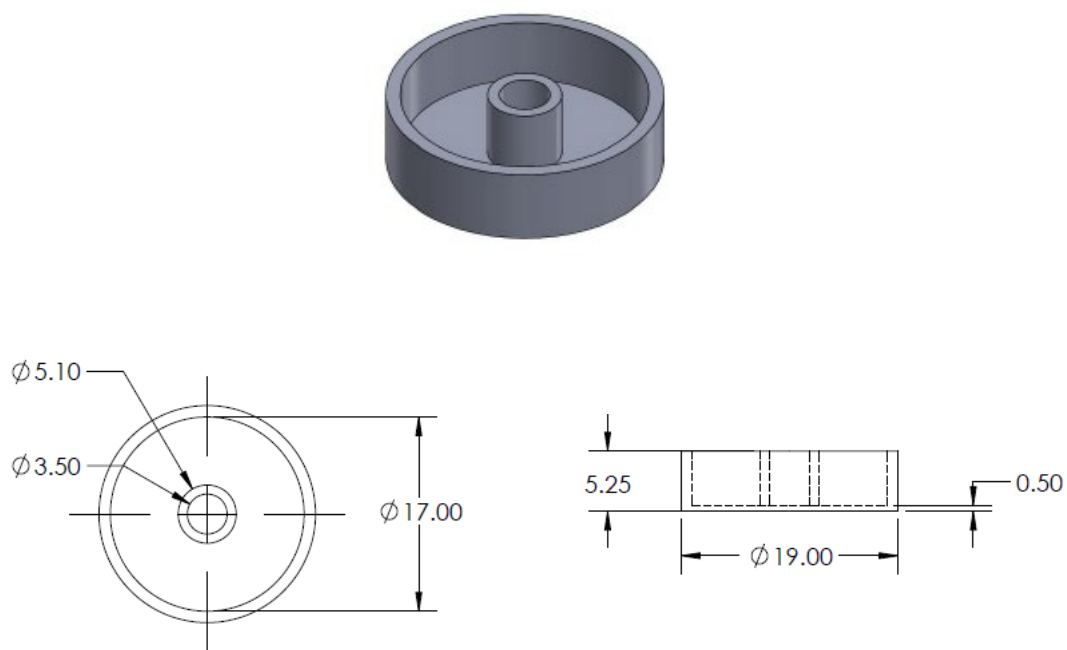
Dimensioned drawing of updated pyrolyzer plate design for larger version of the MFC.
